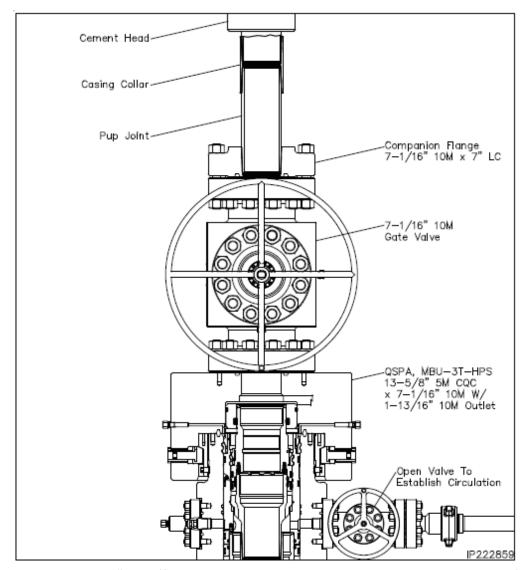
Cactus 7" 5M offline cementing tool. Pressure rating limited by the lesser of 5M tool rating or the 7" pup joint and casing.
